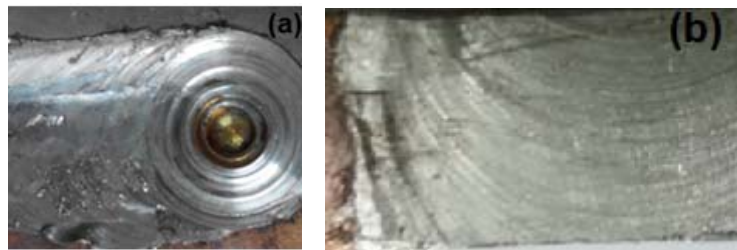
Aluminum on advancing side and the probe was offset 2 mm to (a) Al side and (b) copper side.
